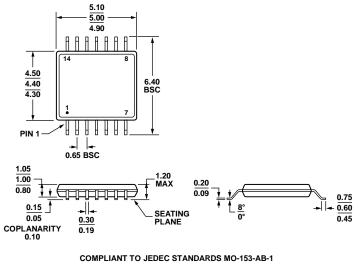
14-Lead Thin Shrink Small Outline Package (RU-14) Dimensions shown in millimeters
